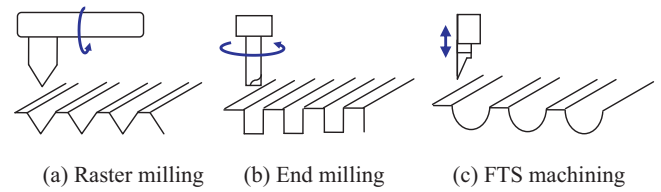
Selection of ultra-precision machining to produce 3D-microstructured surfaces. (a) Raster milling, (b) end milling and (c) FTS machining.
